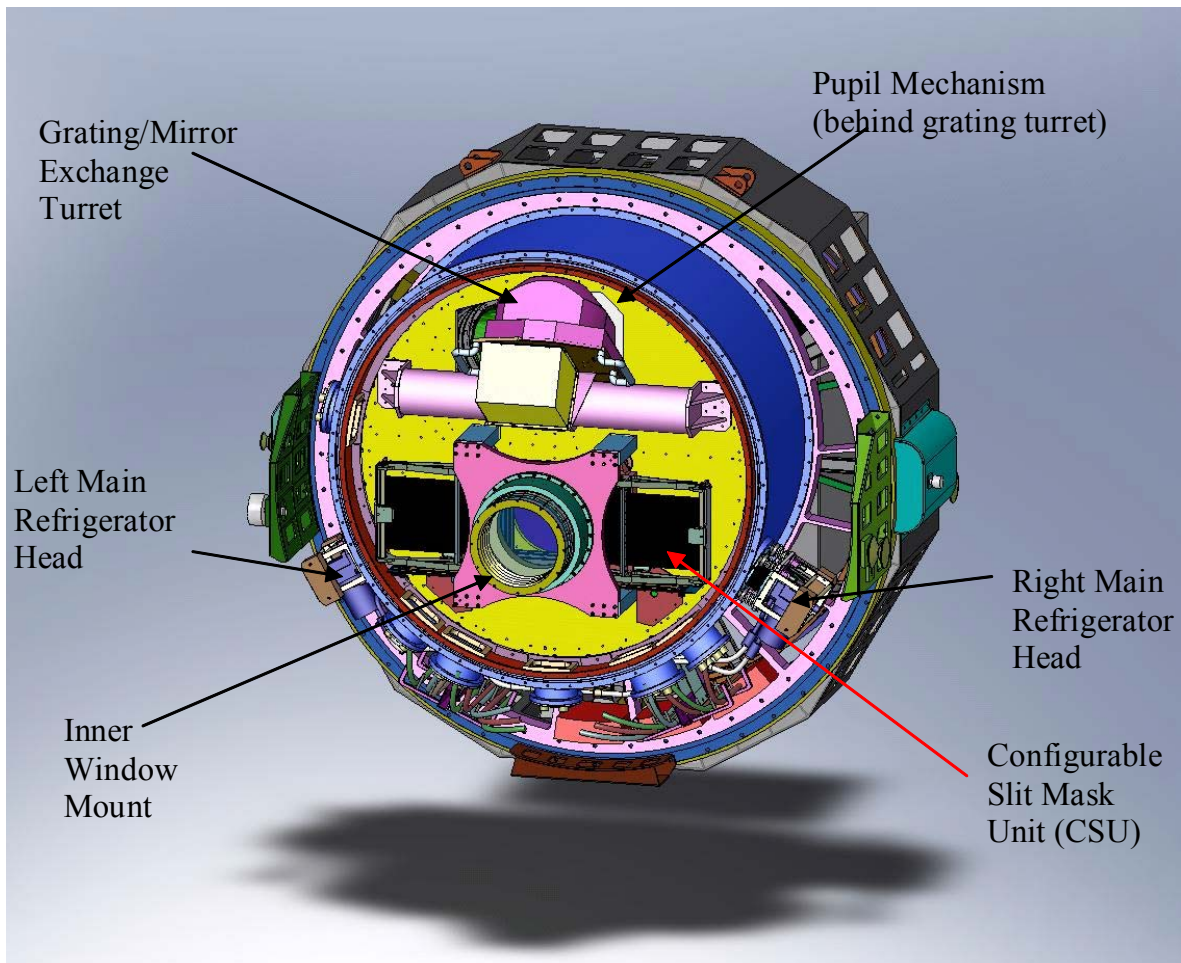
MOSFIRE with the Front Cover and Shields Removed
